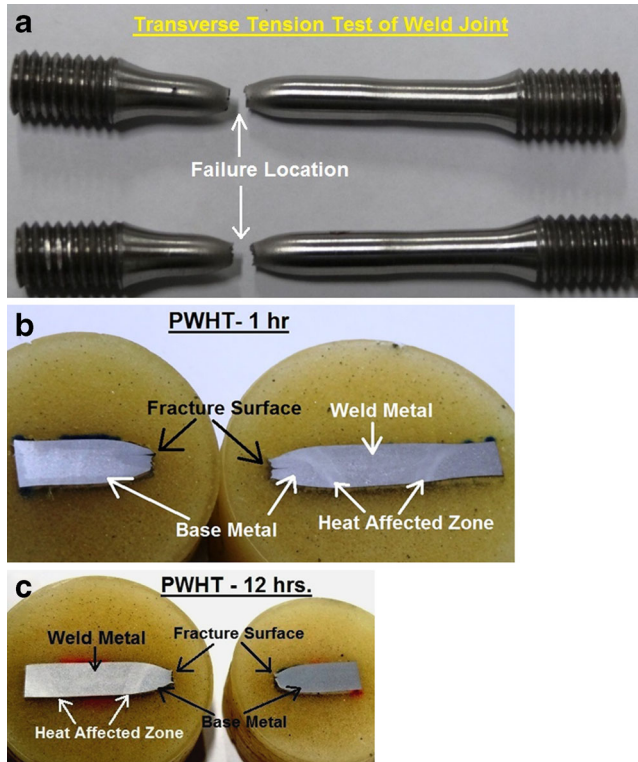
Tensile-tested samples of weld joints showing fractured location: a typical photograph of failed samples, b for PWHT of 1 h and c for PWHT of 12 h
